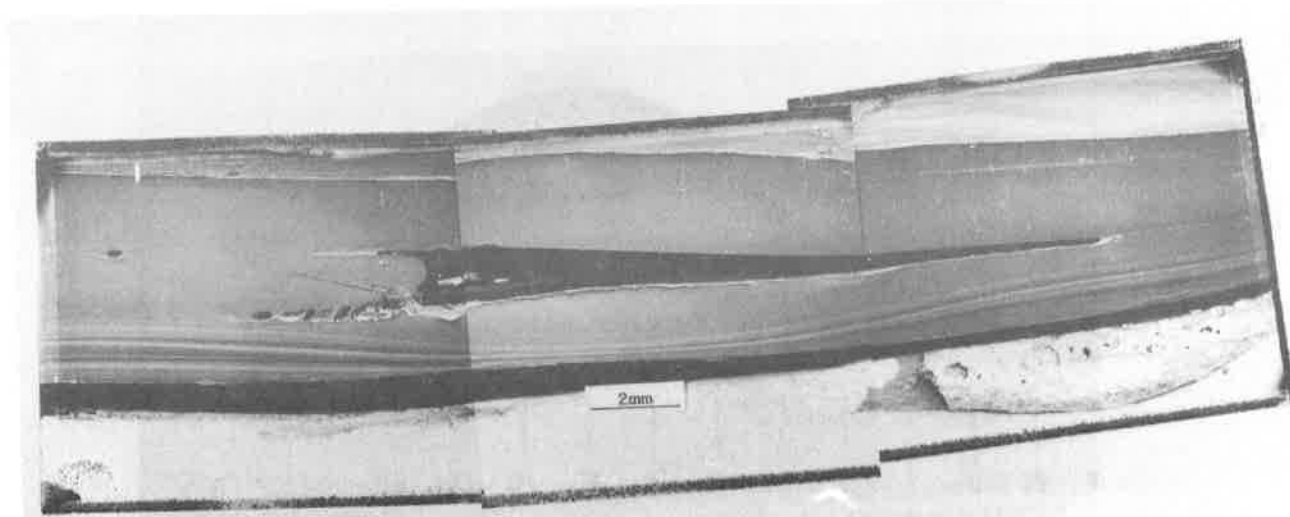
SIDE VIEW OF CUT ALONG LONG AXIS OF EXTRUSION FILLET WELD SHOWING AIR CHANNEL AT LOCATION "A" AND LEAK PATH AT LOCATION "B"
